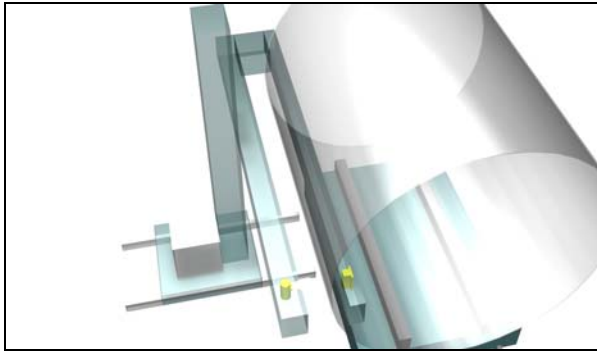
Manipulator for scanning longitudinal welds in pipes with bigger diameter
